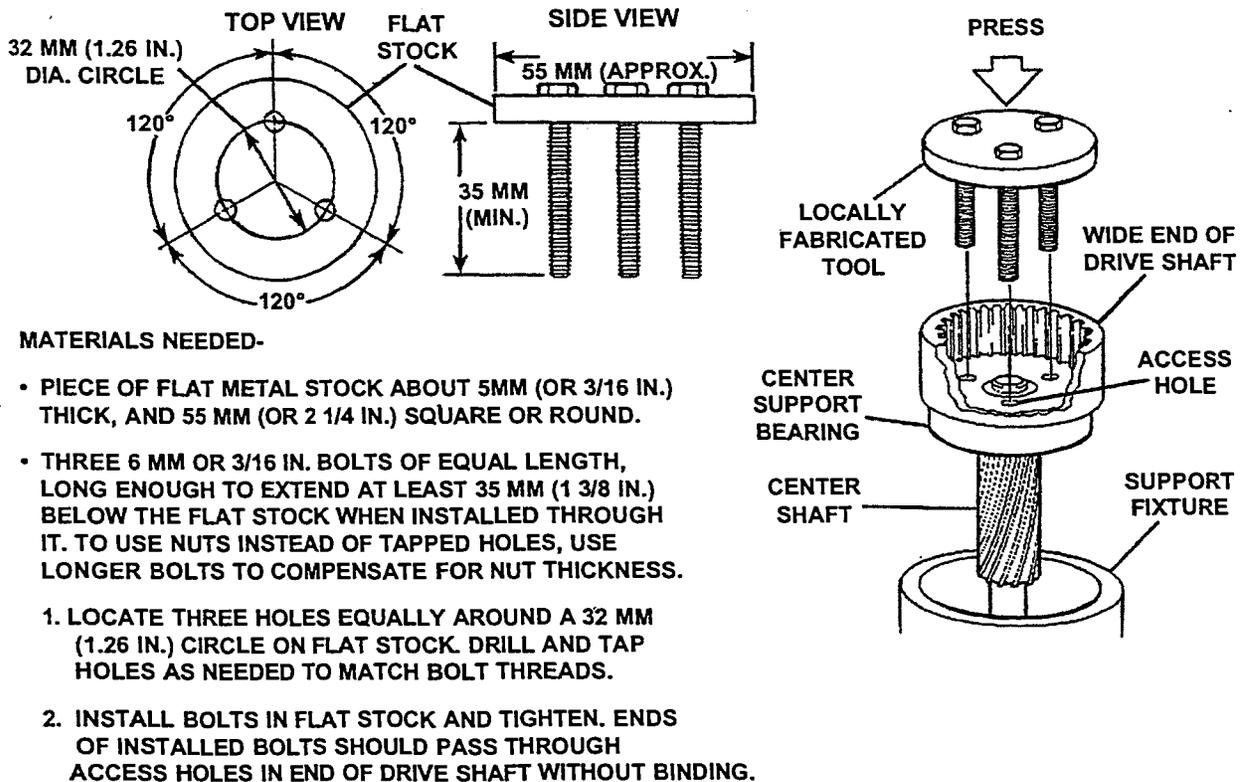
TOOL FOR REMOVING CENTER SUPPORT BEARING
